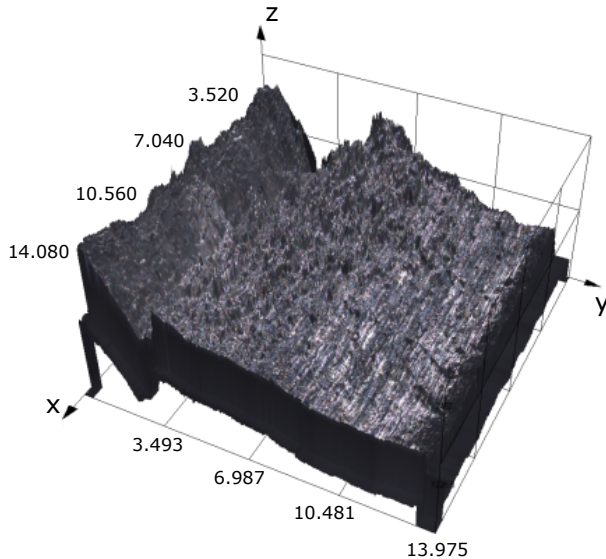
The three-dimensional fracture surface of the fretting fatigue specimen FF19 (dimensions in mm).
